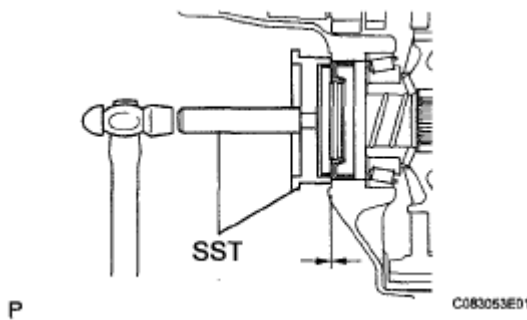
Installing Differential Side Bearing Retainer Oil Seal
